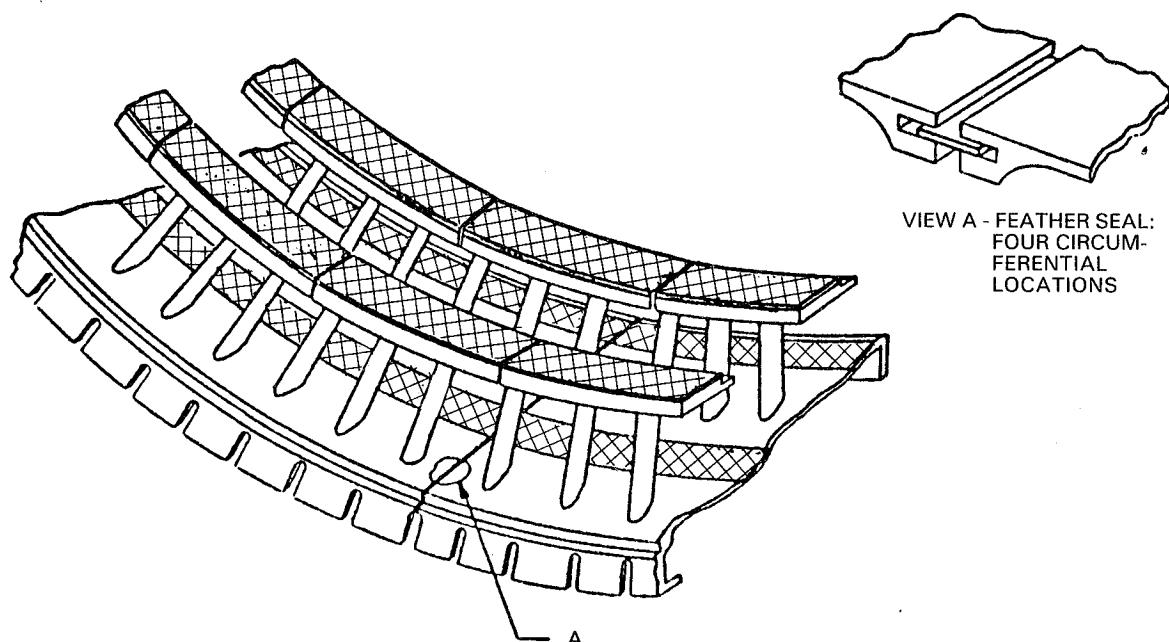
Rear Stator and Shroud Assembly
